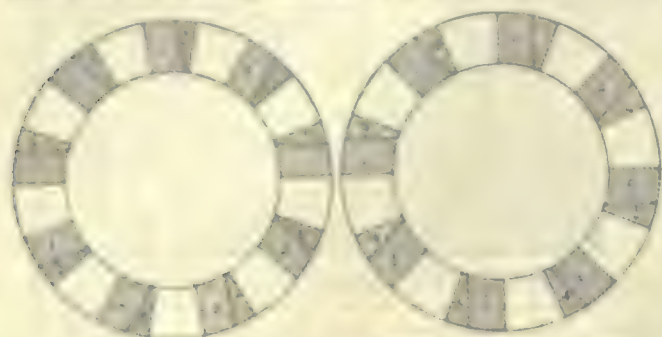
DIAGRAMS TO ILLUSTRATE METHODS OF CUTTING CLUTCH TEETH BY MILLING
